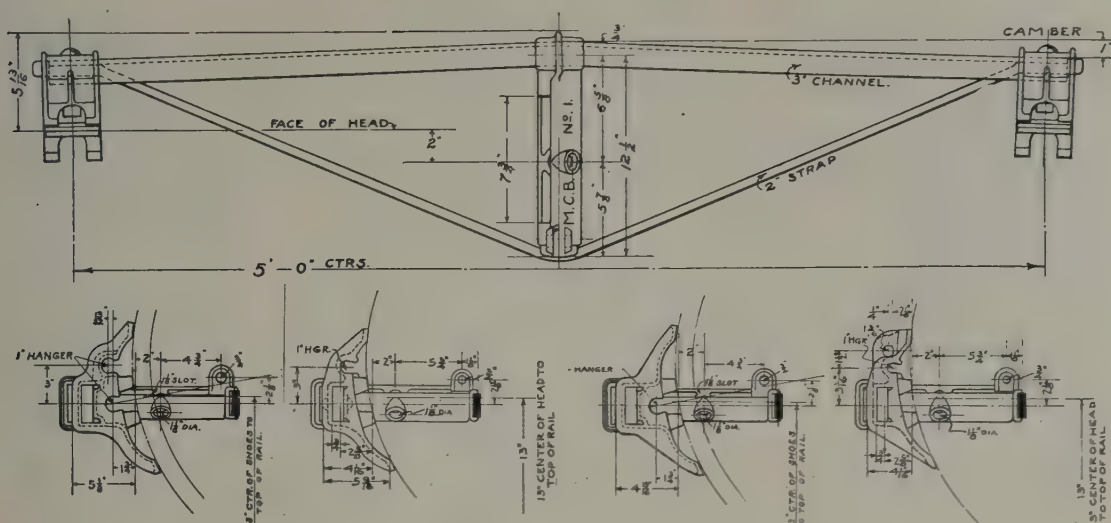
Huntoon M. C. B. No. 1 Brake Beam. Joliet Railway Supply Company.
